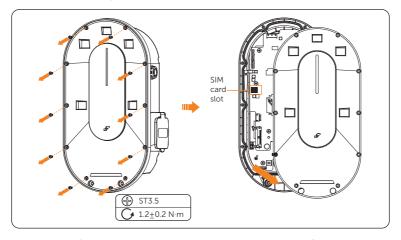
Remove the front panel cover and locate the SIM card slot
